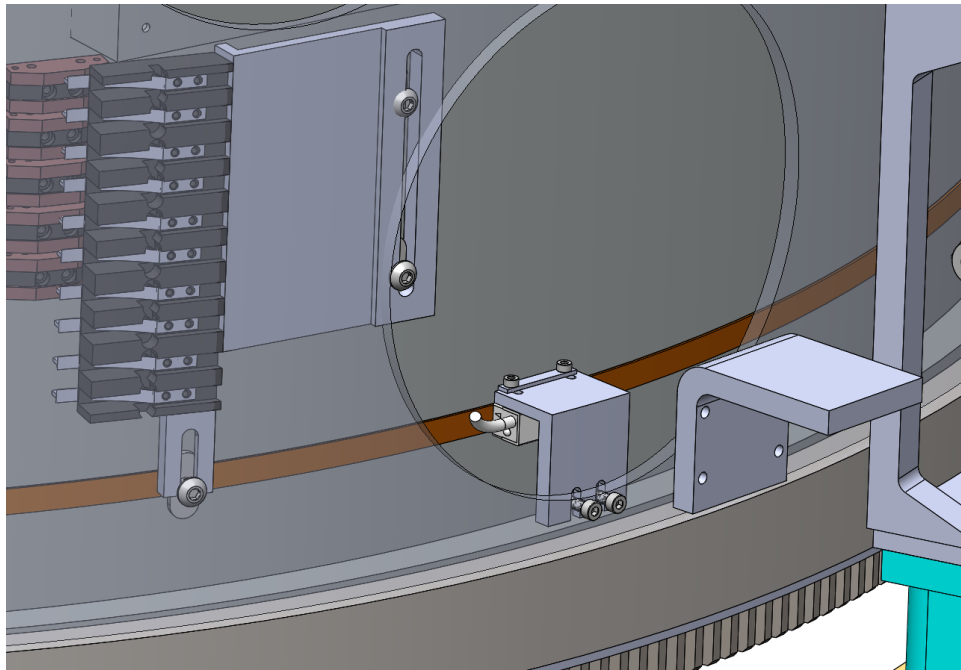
Renishaw tape (brown) on the inner drum. The figure also shows the readhead in the assembly.
